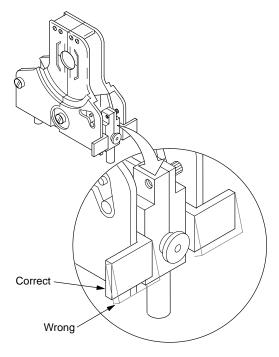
Proper Latch Position (Series 8 Fixture)
